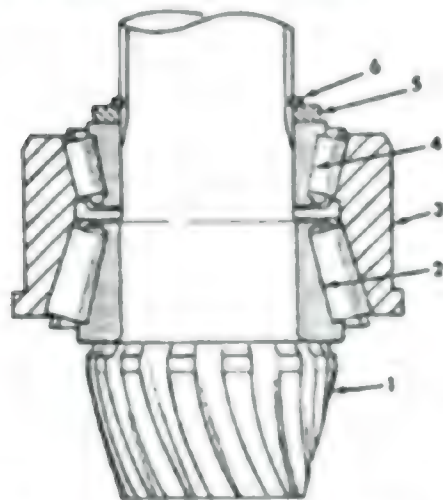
View showing bearings on bevel pinion shaft used on Models 684, 784 and 884.
